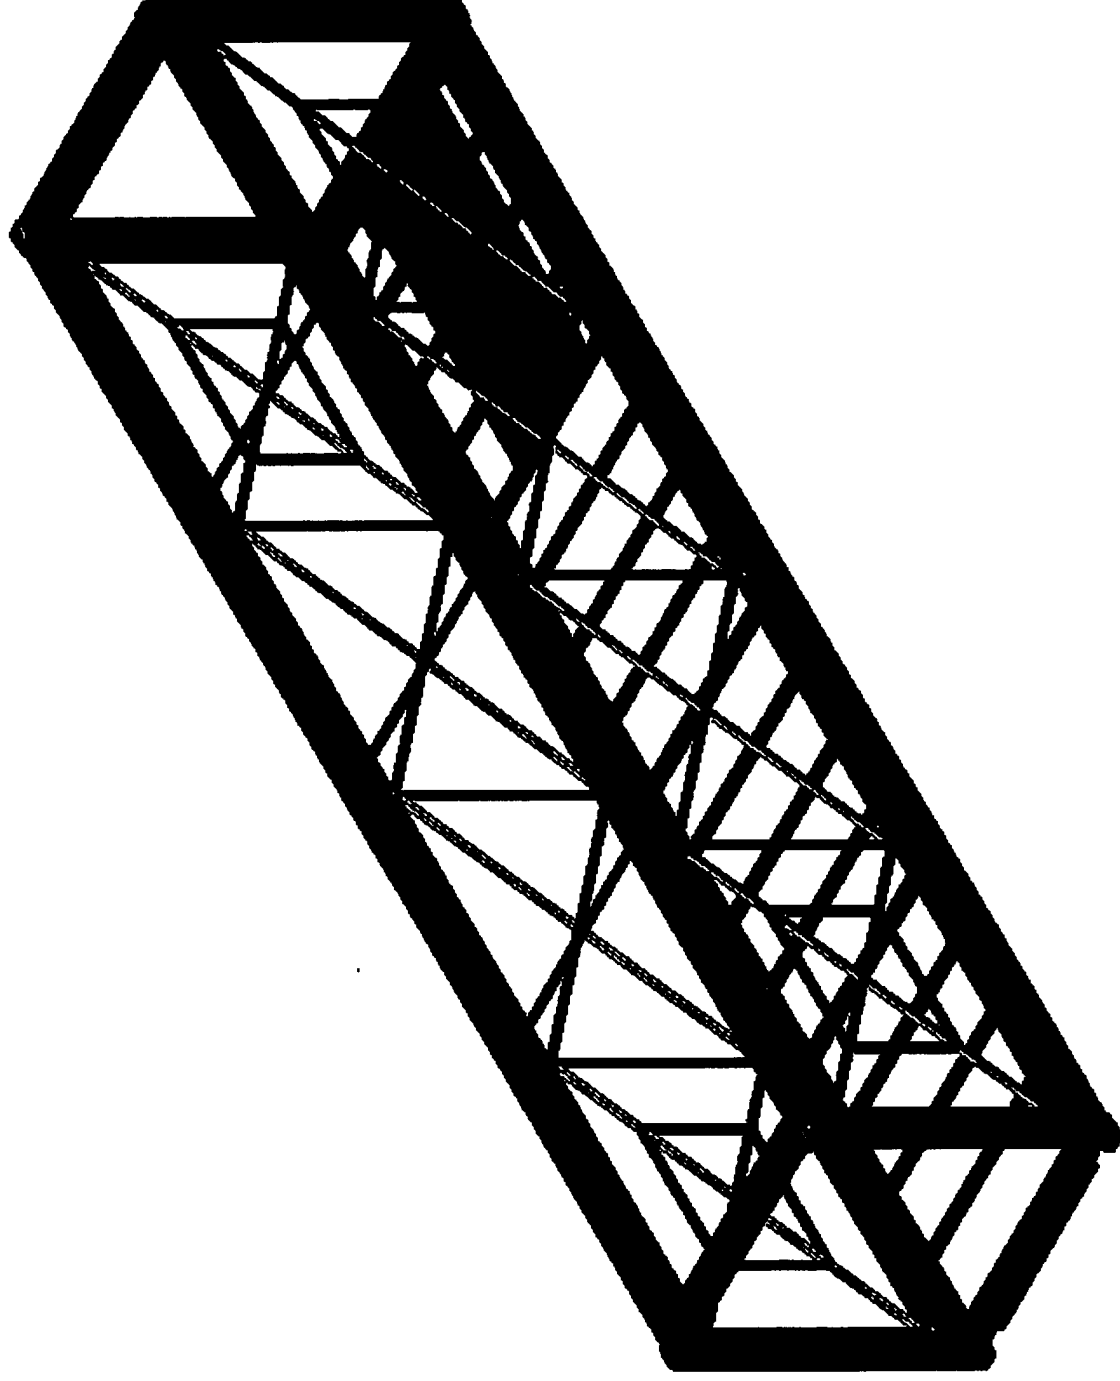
B: Opaque isometric view of the 40 foot high cube collapsible cargo container frame
